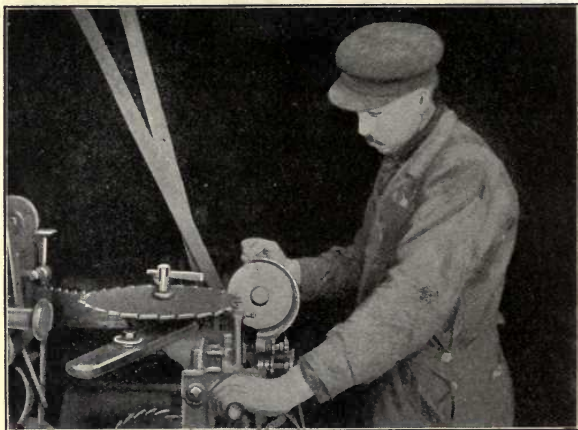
Type of semi-automatic machine used for sharpening small circular saws.
